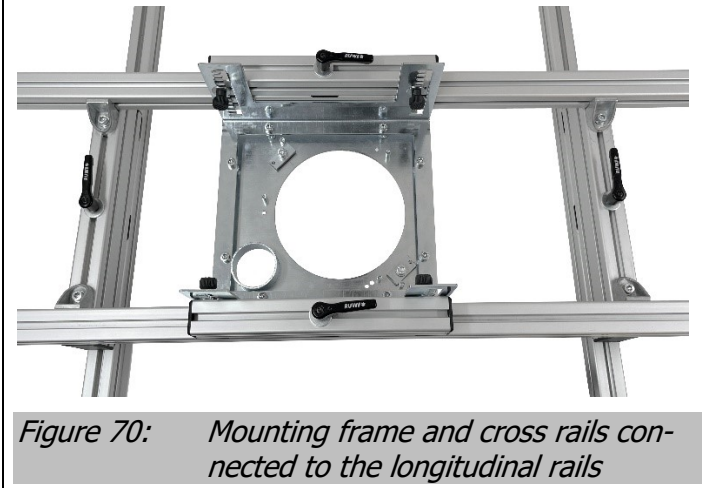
Mounting frame and cross rails connected to the longitudinal rails
